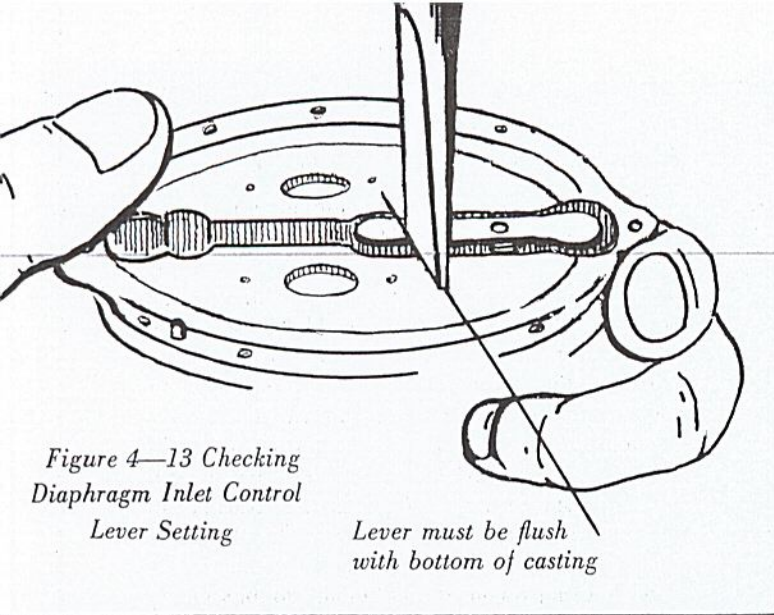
Checking Diaphragm Inlet Control Lever Setting
